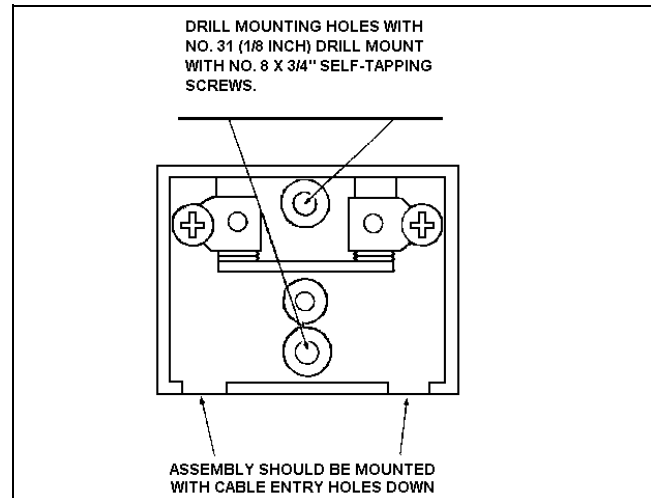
INSTALLATION OF 12-VOLT FUSE ASSEMBLY
